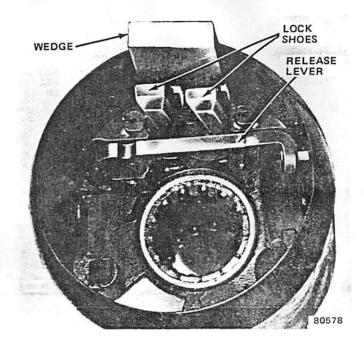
J-57 Relieving Lock Shoe Spring Tension
